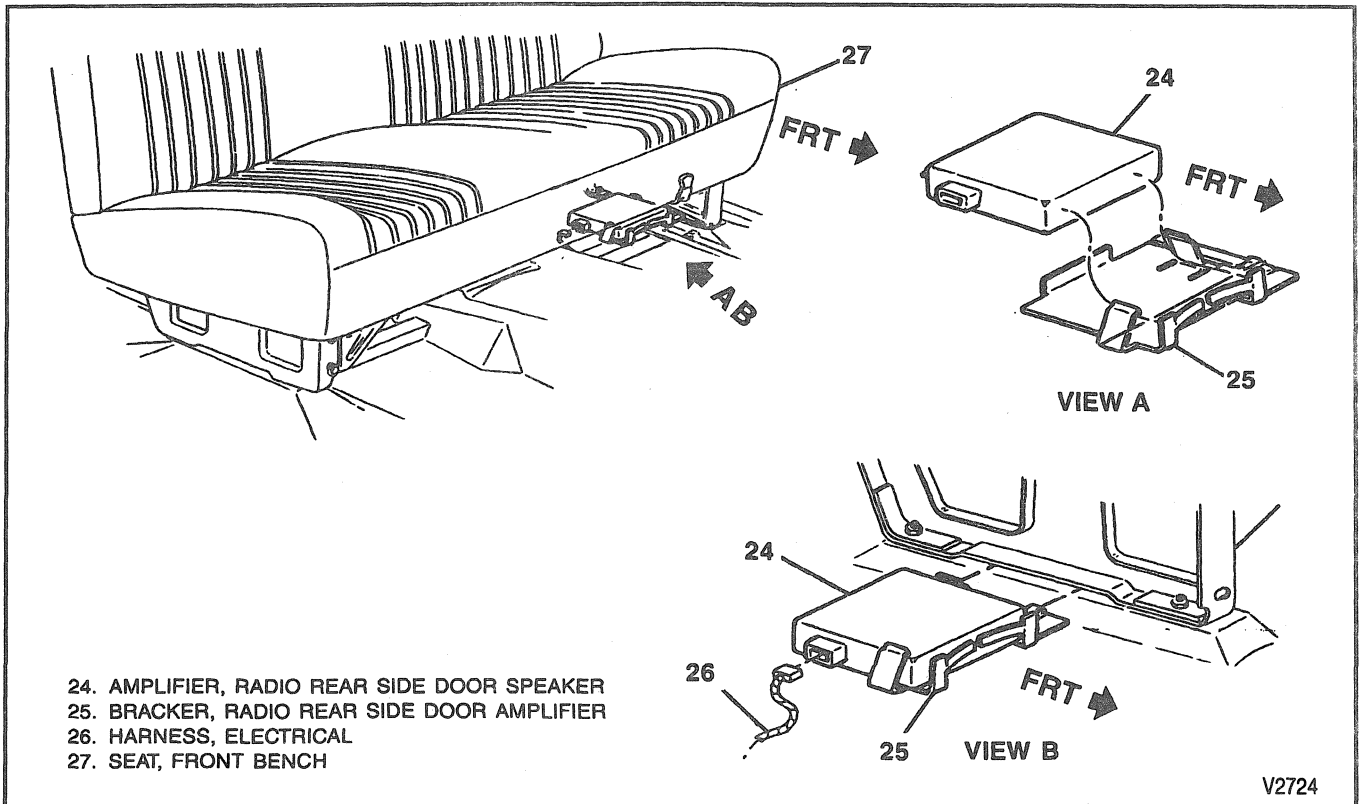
Amplifier Assembly (Front Bench Seat-Suburban Models)
